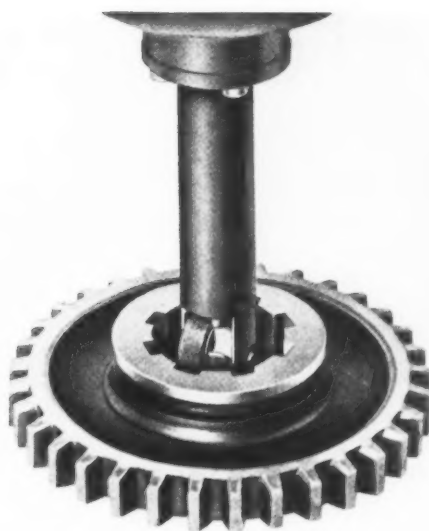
Grinding Wheel Driven by a Turbine Rotor Mounted at the End of a Vertical Tube
